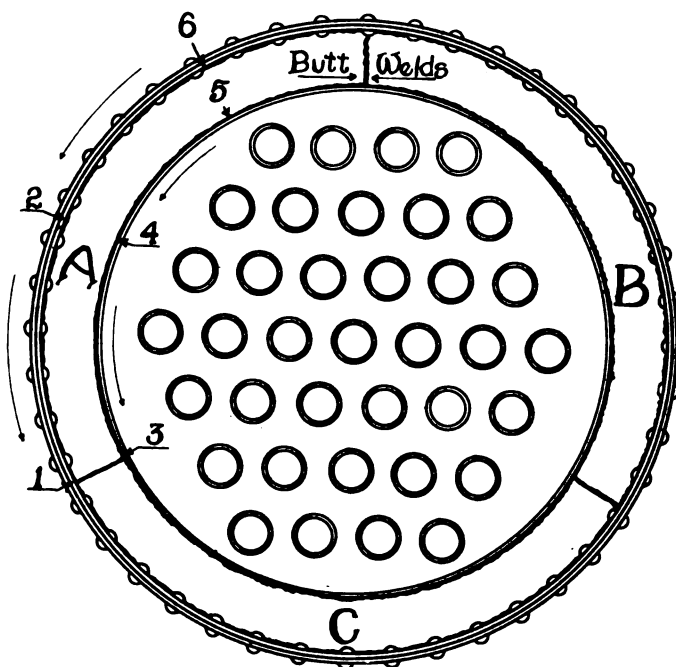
A SKETCH OF THE BOTTOM OF THE BOILER SHOWING HOW THE WELDING WAS SHIFTED FROM ONE SIDE TO THE OTHER TO PREVENT LAPPING AND BUCKLING
